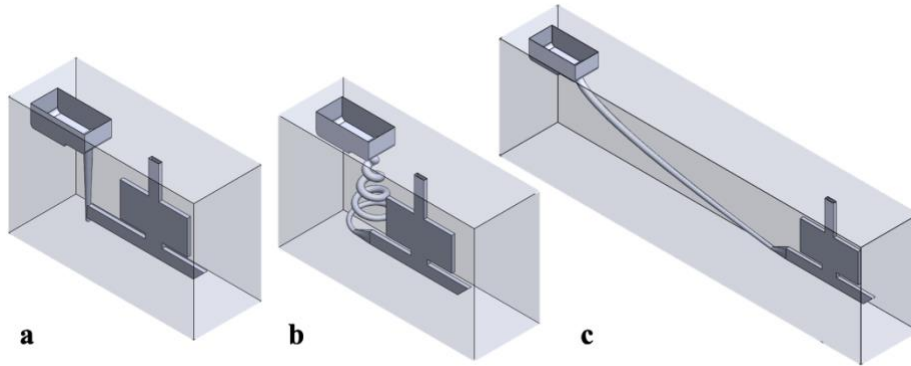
CAD models for 15mm plate castings with straight (a), helical (b) and parabolic (c) sprue geometries.
